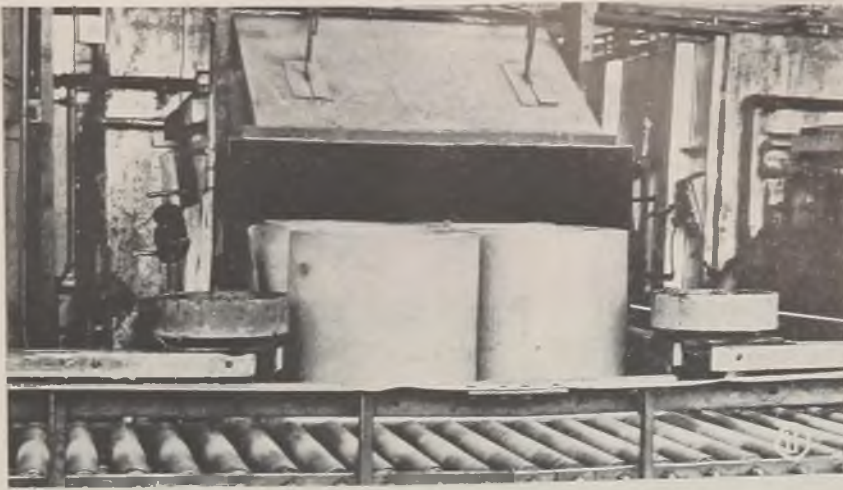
Rufty annealing coils shown here emerging from a roller-hearth, gas-fired furnace. The conveyor will take the coils to a straightener, pickling and cleaning machines and finally to a slitter
